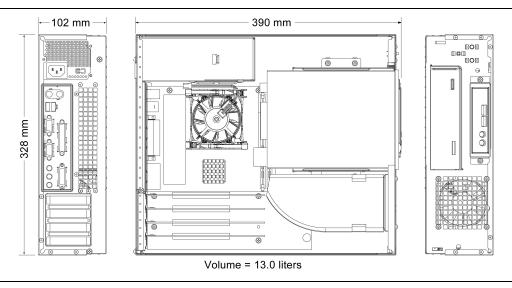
13-Liter Reference Chassis Design Layout, Front Duct
